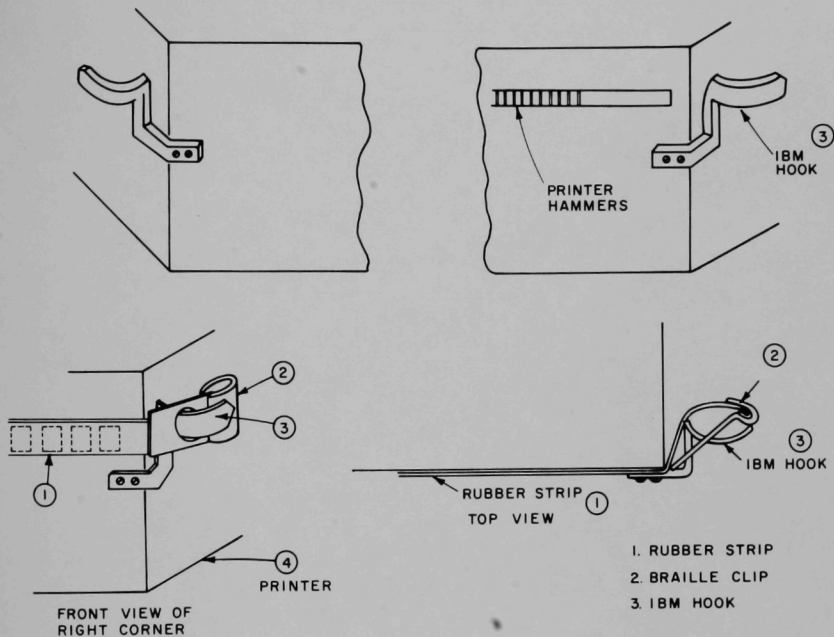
Method of Attaching Cushioning Strip to IBM Braille Hooks
